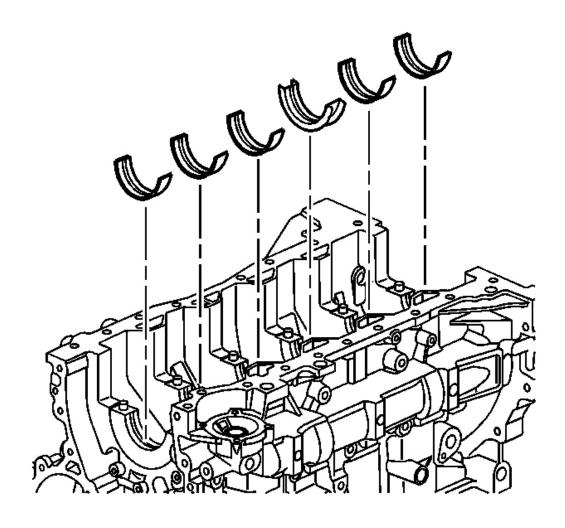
View Of Upper Crankshaft Main Bearing Halves Courtesy of GENERAL MOTORS CORP.
